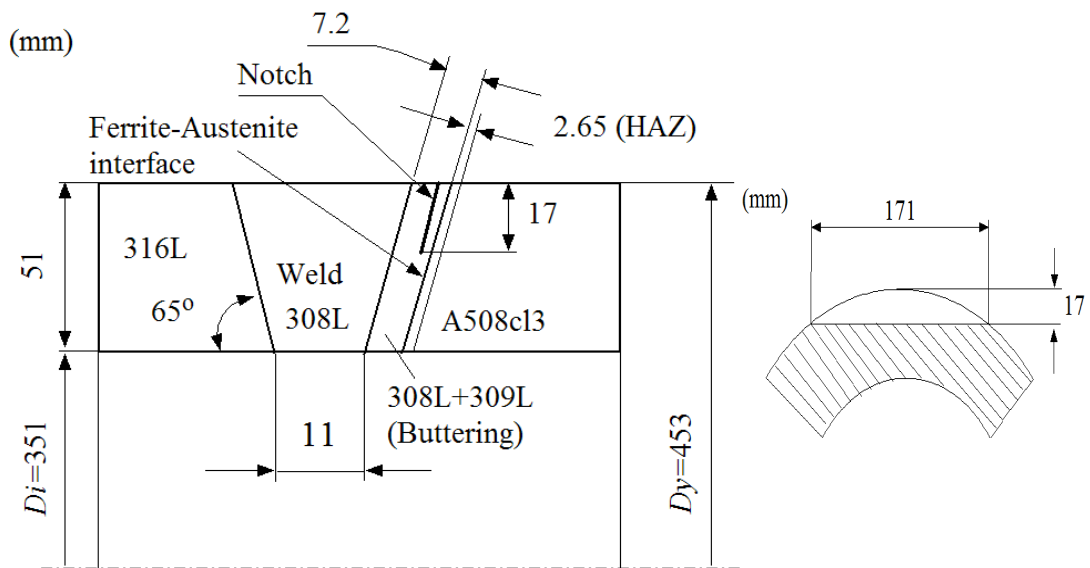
Details of the dissimilar metal weld geometry.
